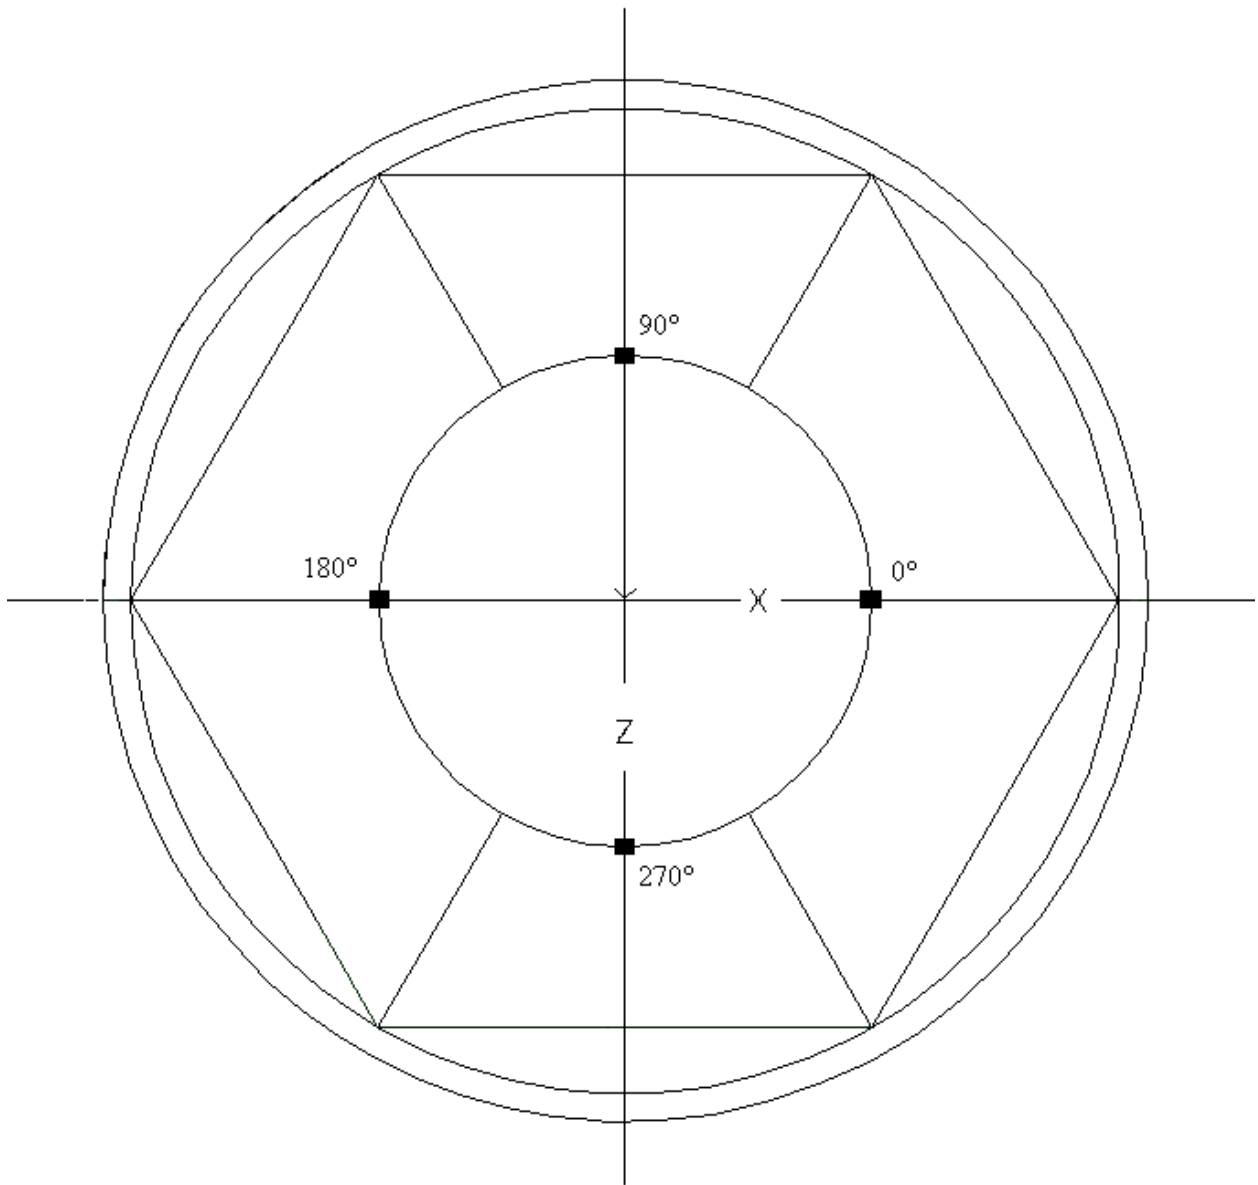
Locations of the 0°, 90°, 180° and 270° points on the motor assembly
